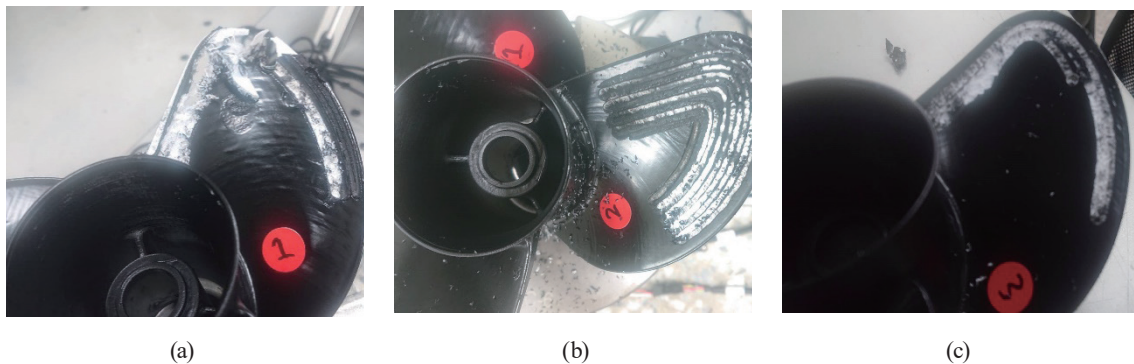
(Color online) Actual cutting paths of propeller blades. (a) Path of Blade 1, (b) path of Blade 2, and (c) path of Blade 3
